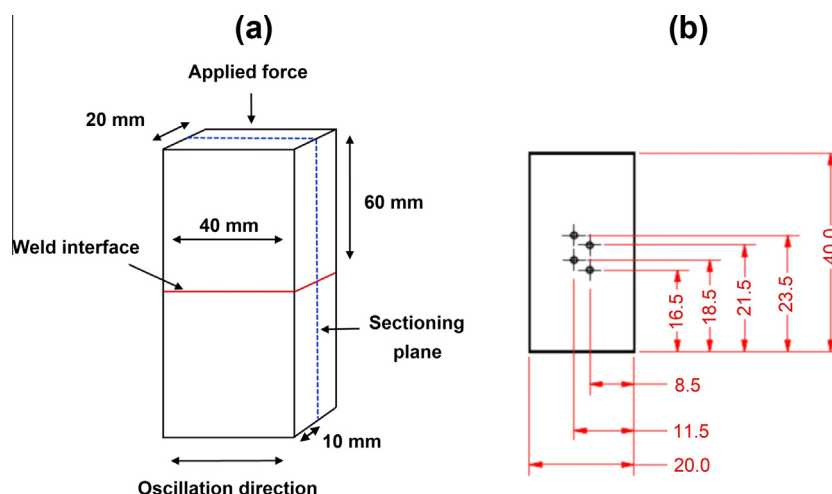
(a) Experimental workpiece dimensions and location of the sectioning plane (note that 60 mm represents the height of a single workpiece), and (b) thermocouple hole positions (dimensions are in millimetres).
